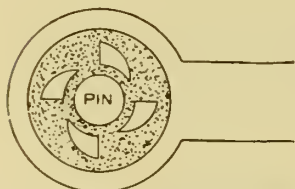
Steel Plate Bushing Used between Butt Knuckles.
